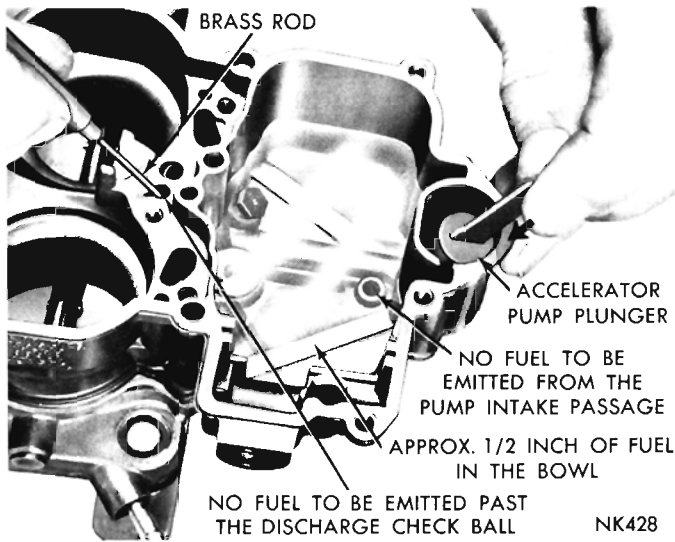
Testing Accelerator Pump Discharge and Inlet Check Balls
